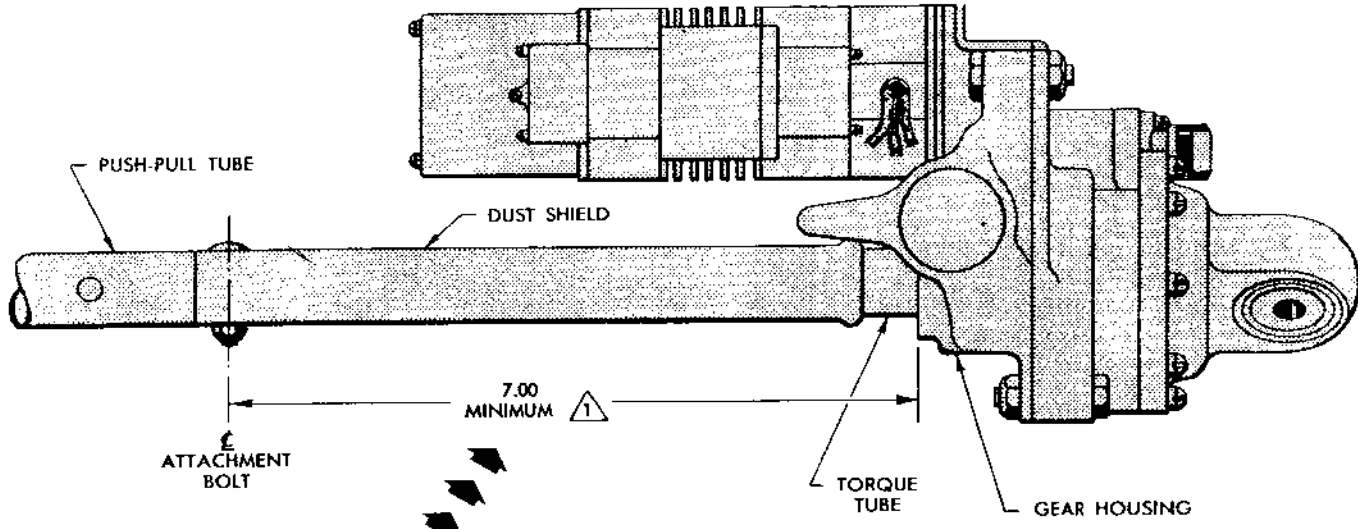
(Sheet 2 of 3 Sheets) — Wing Flap Installation
